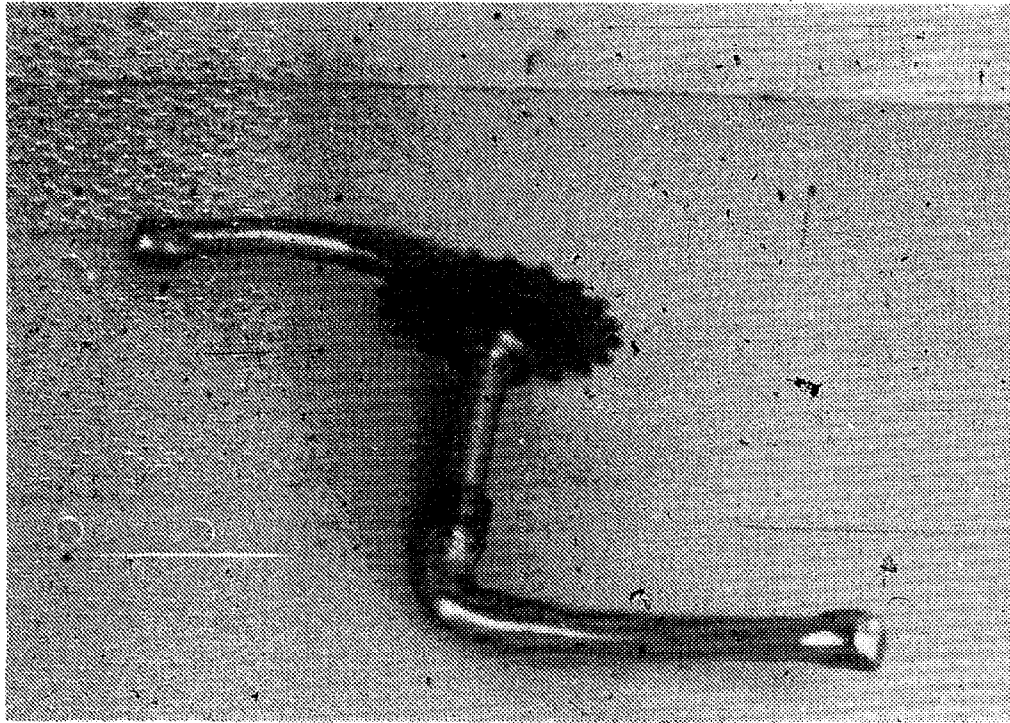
The sprocket is positioned on the crank and ready for brazing.
